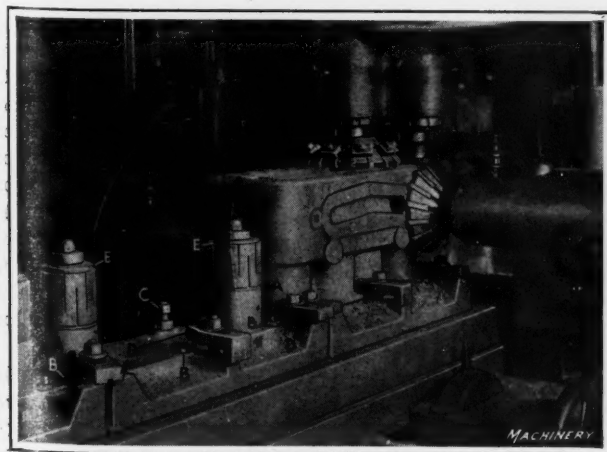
Work-holding Fixture and Cutters used for machining Packard Cylinder Blocks on Beaman & Smith Multiple-spindle Milling Machine
